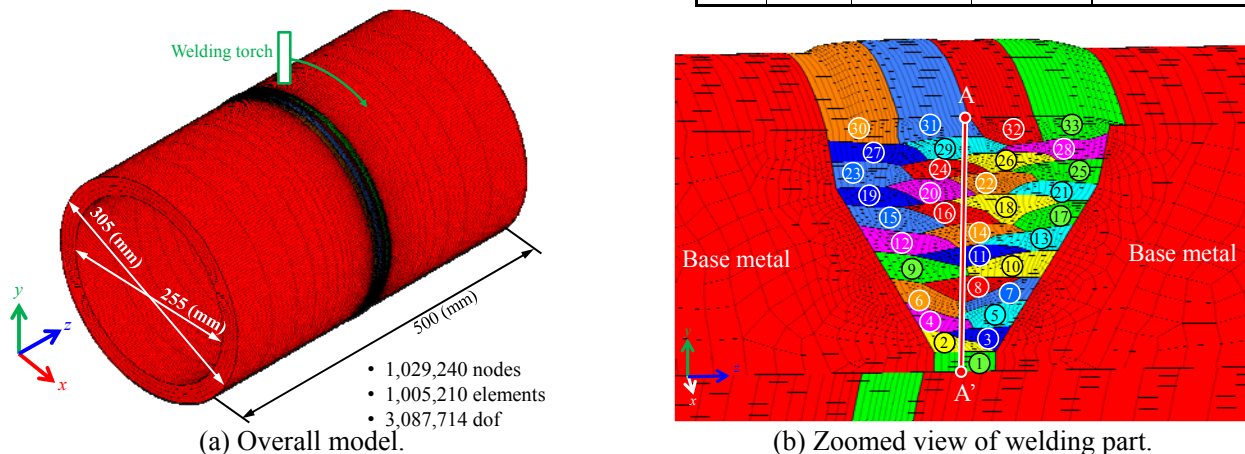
Analysis model of V groove multi-pass welding.
